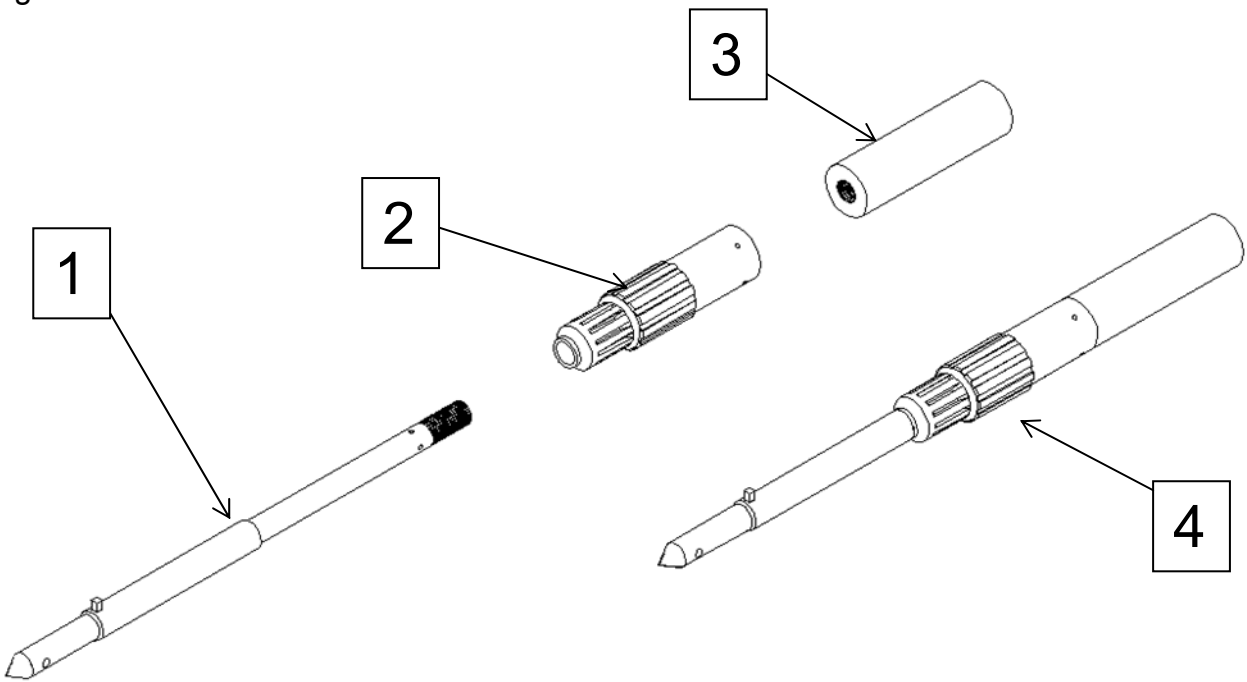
New inner rod attached to freely rotating piece through tracked inner-core
